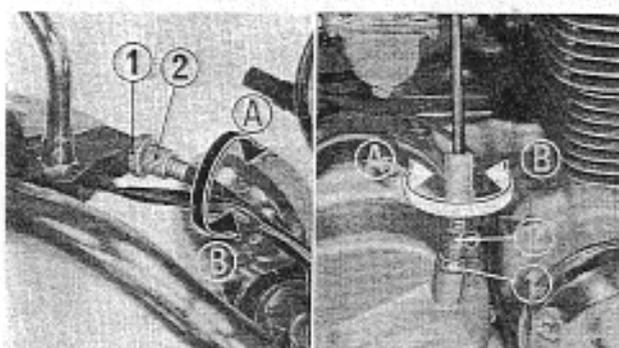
① Lock nut ② Clutch cable adjuster
